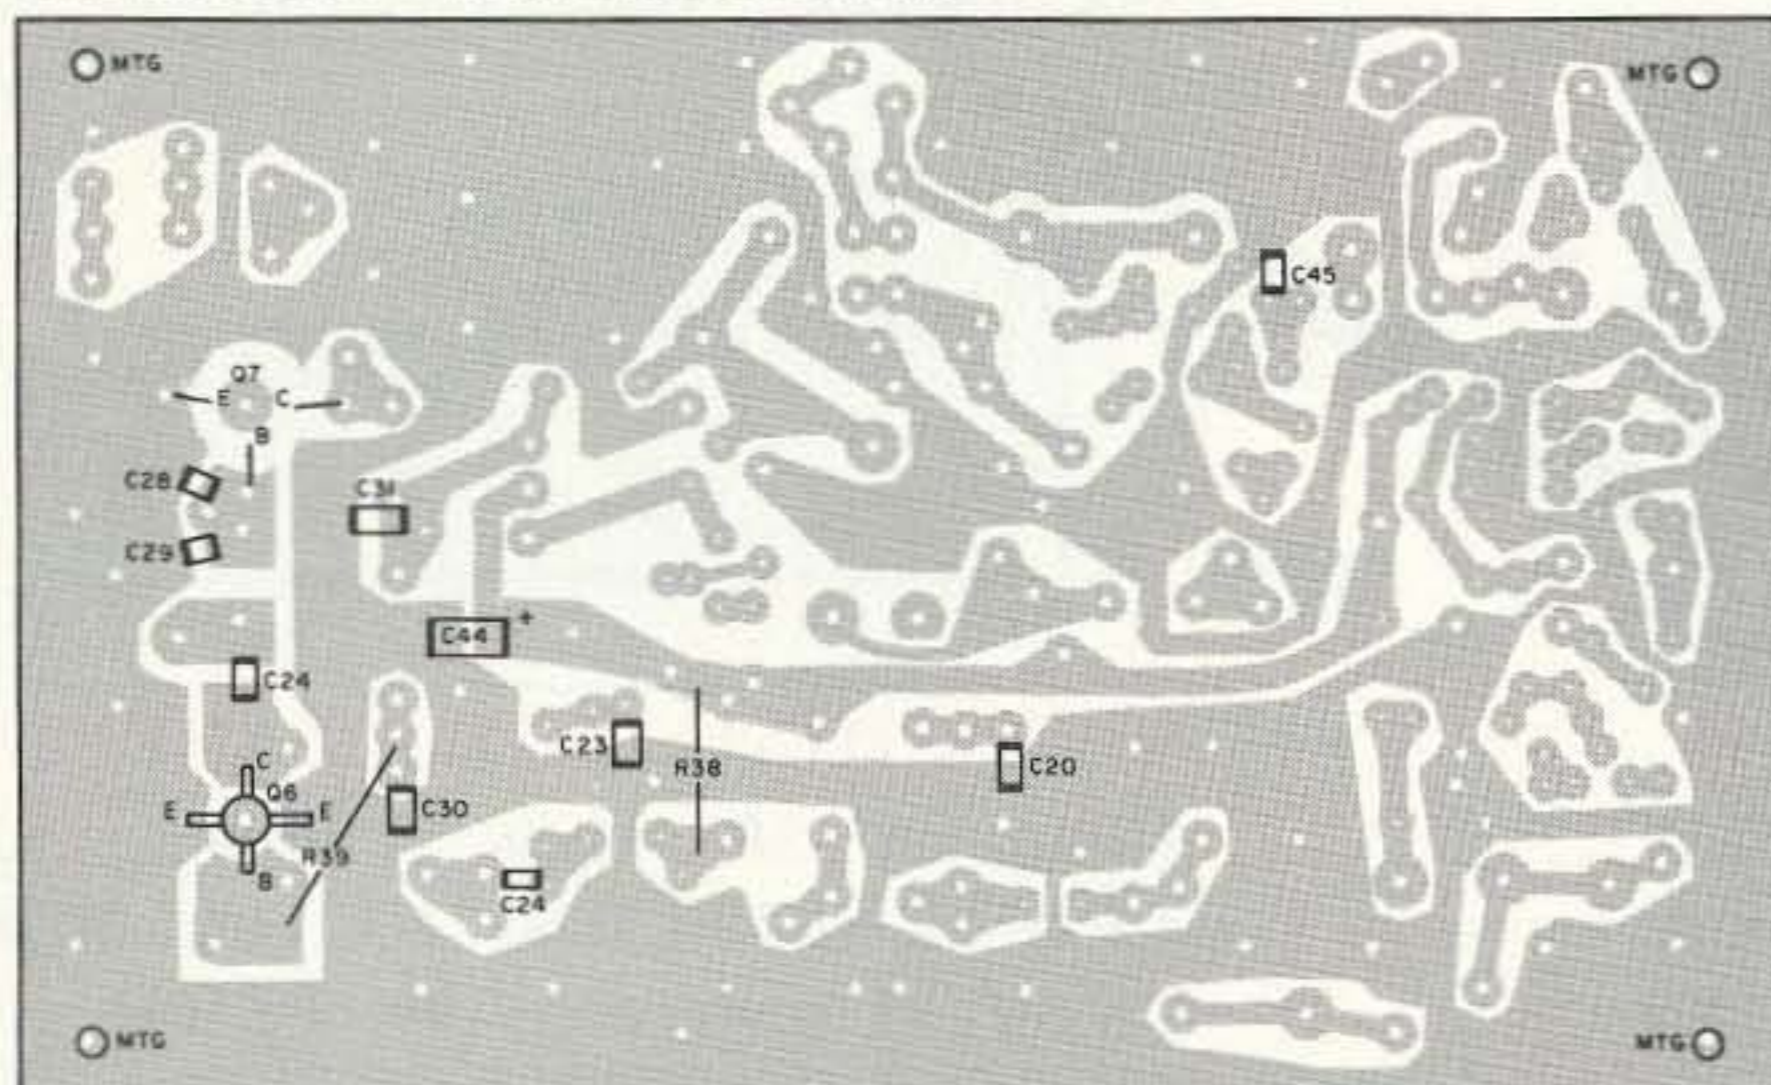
Parts placement of the components that need to be mounted on the solder side of the PC board (the opposite of the component side).
